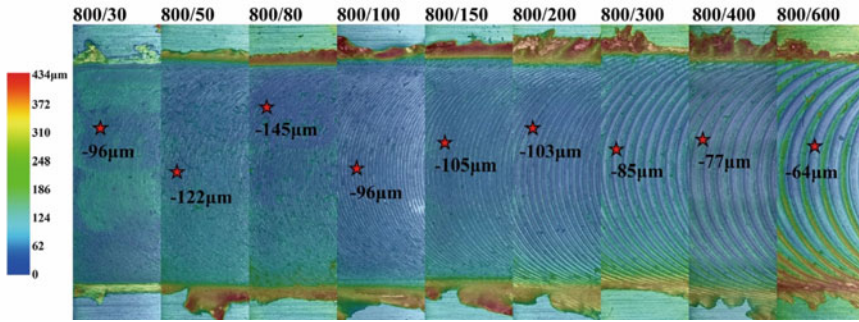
Characteristics of weld surface appearances by high depth-to-width ratio FSW (the pentagons were the trough thickness reduction points at different welding speeds)
